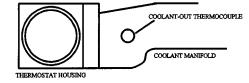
Coolant-out Thermocouple Location (Top View)
